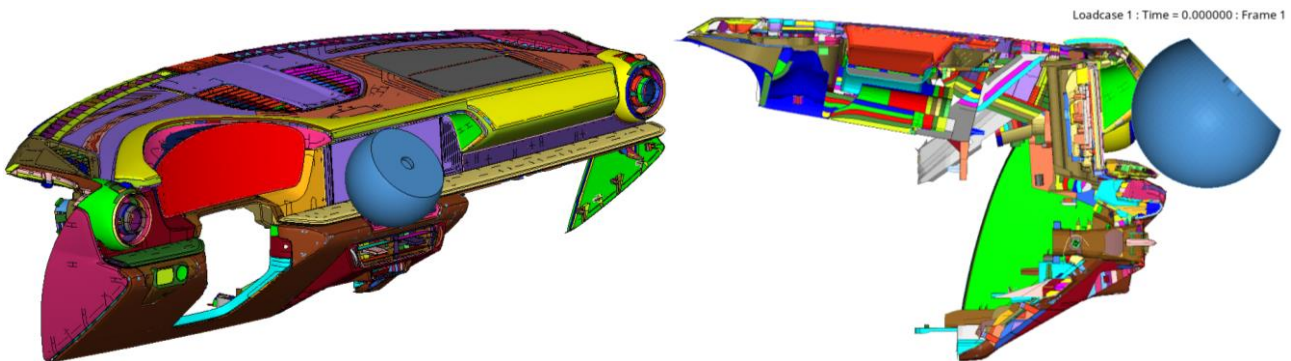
Full view and left side section of the head impact with modified lower shell (time 0 ms)
